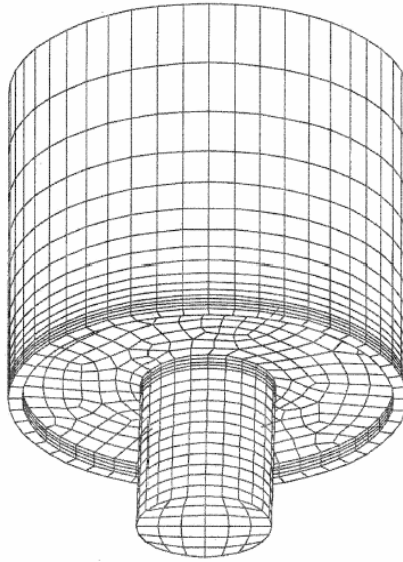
Enlarged view of Ulysse FSW tool FE mesh. [22]
